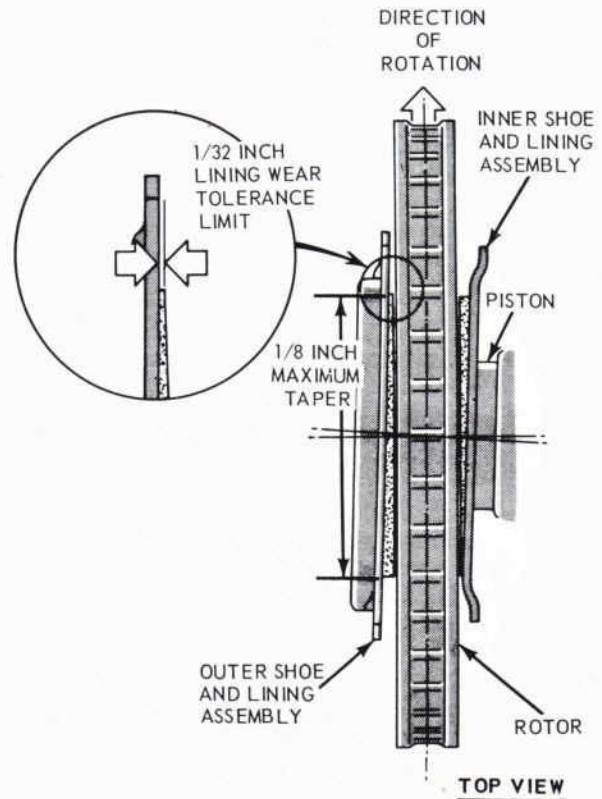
Taper Wear Pattern Tolerance Specification
